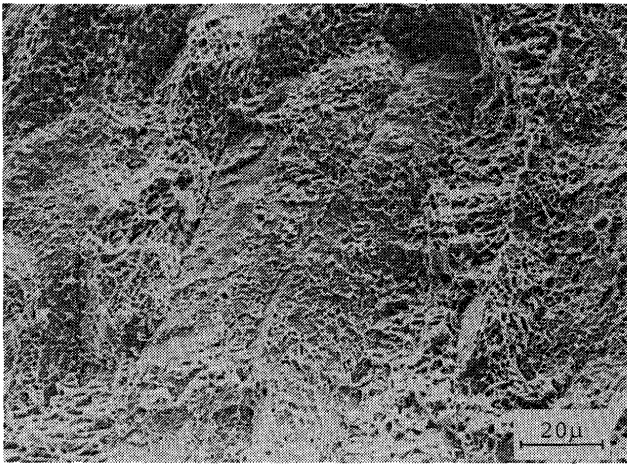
Root cracked surface in weld metal occurred with Controlled restraint fillet weld cracking test⁴⁾. material; HT80 (25 mm thickness), electrode; E11016 (hydrogen; 20 cc/100 g), heat input; 17,000 J/cm, non-preheating
